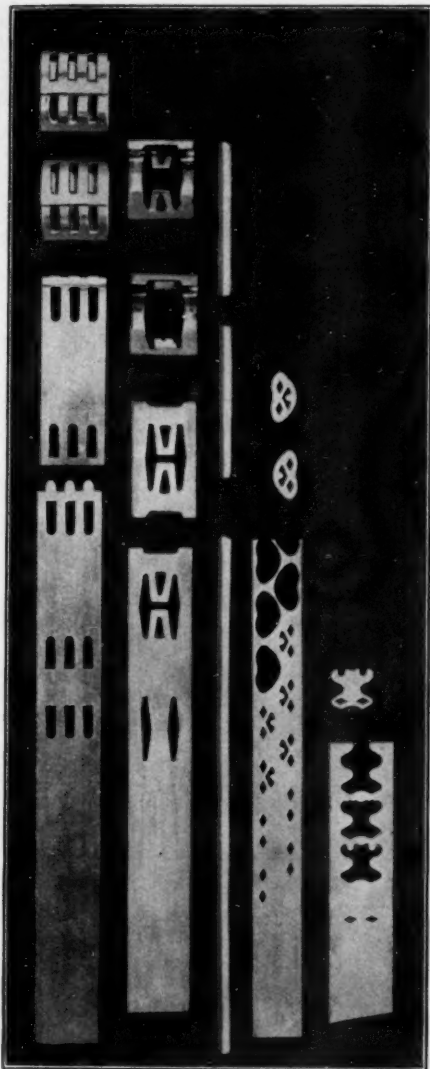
HOW LINK PARTS ARE FORMED IN SPECIAL MACHINE
